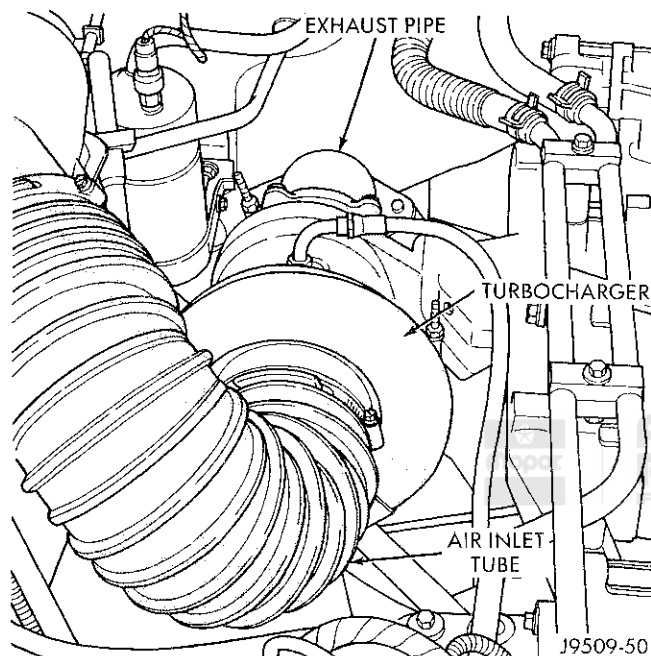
Air Intake Pipe, Exhaust Pipe and Turbocharger
